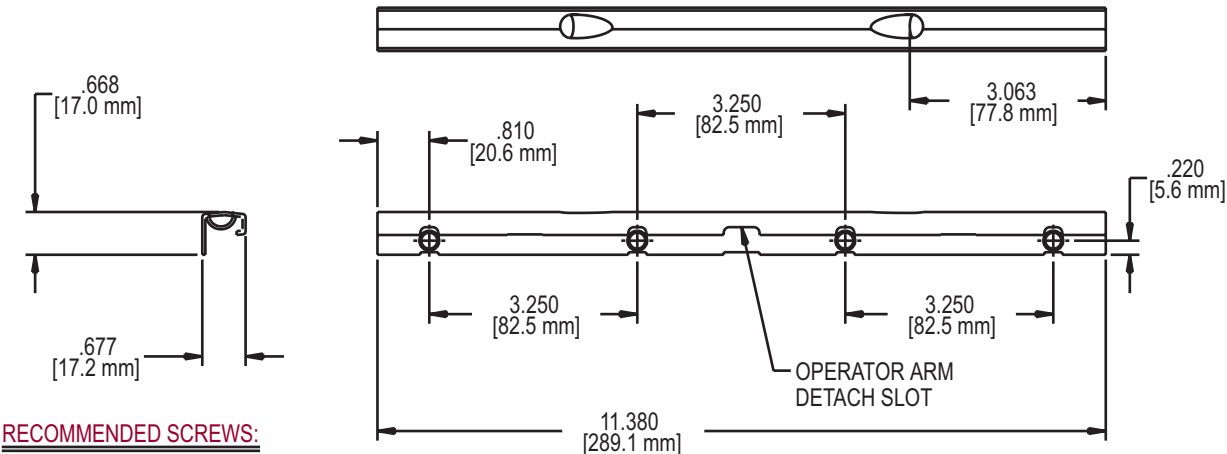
SINGLE ARM OPERATOR TRACK (3 HOLE) 31375.92
